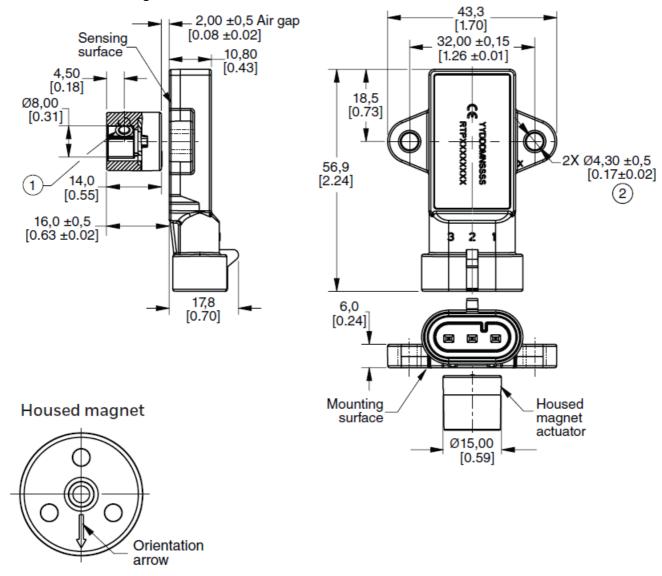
MOUNTING DIMENSIONS (FOR REFERENCE ONLY: MM [IN].)
